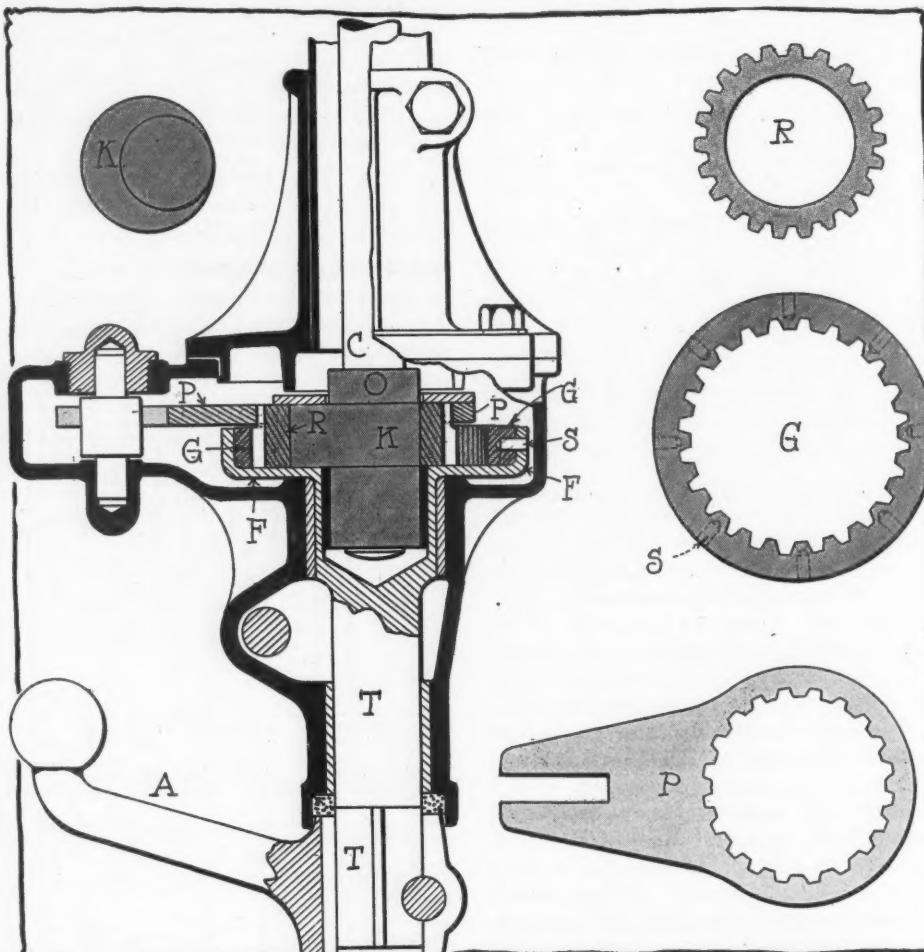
INTERNAL MECHANISM OF OAKLAND STEERING GEAR
